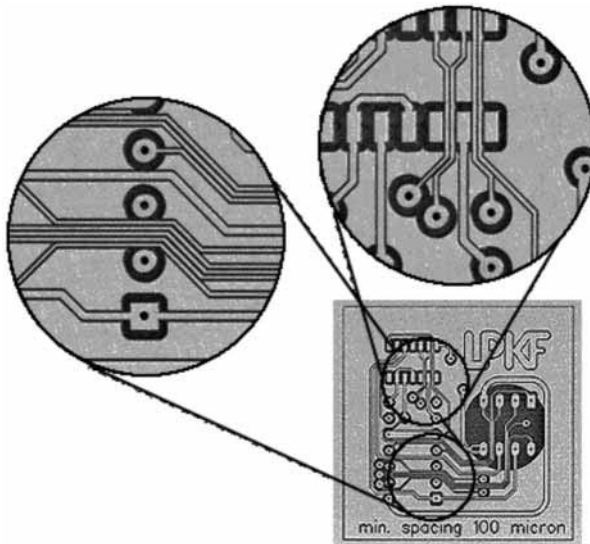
Example of foil routed PCB. (Courtesy of LPKF Laser & Electronics AG.)
